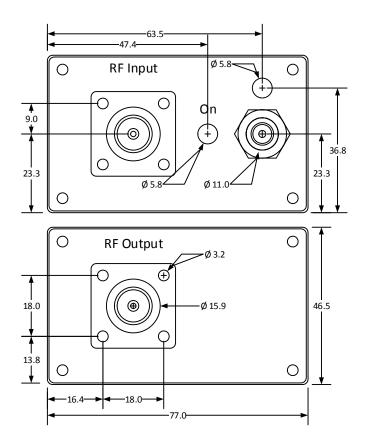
~ Front (top) and rear panel layouts drawn with Visio software. Dimensions are in mm. The RF connectors are on the left and the on-off switch near the middle. The power connector is middle-right. The hole for the LED above the power connector is shown undersize and will need to be reamed slightly to accommodate the press-fit LED shown in the material list. Flange-mount type N adapters are shown but bulkhead-mount may be used. When the enclosure is assembled, the RF input and output connectors are offset (one on each side when viewed from the font), minimizing the chance of physical interference with the amplifier connectors on the inside.
